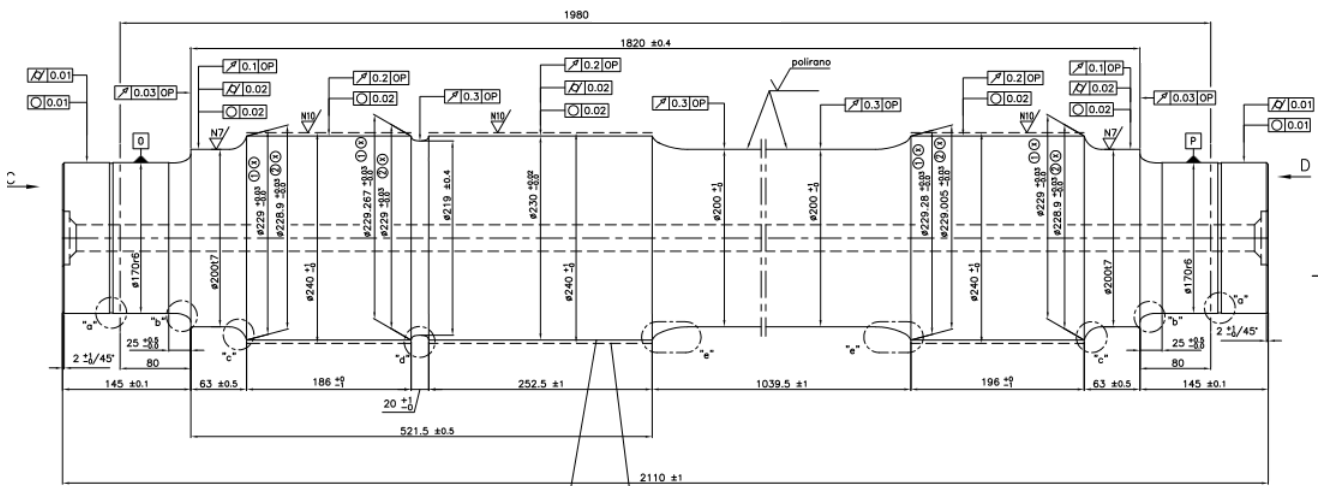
Drive shaft of a locomotive, series 441 [21,22]
